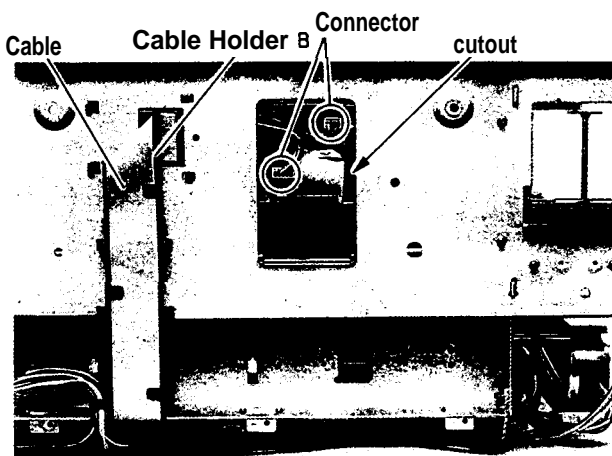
Cable Holder B and Connector Removal (Back of Base Frame)
